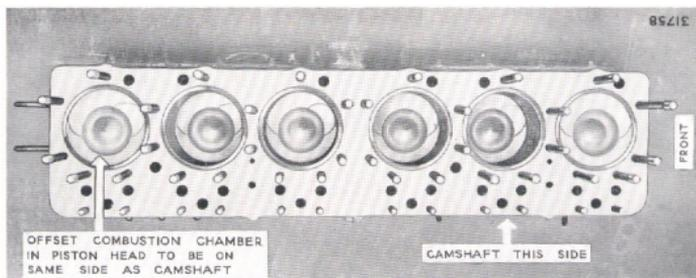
Position of offset combustion chambers in piston heads in relation to the camshaft.
